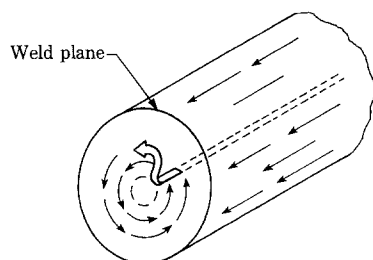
Schematic illustration of metal flow during inertia-friction welding [9].
